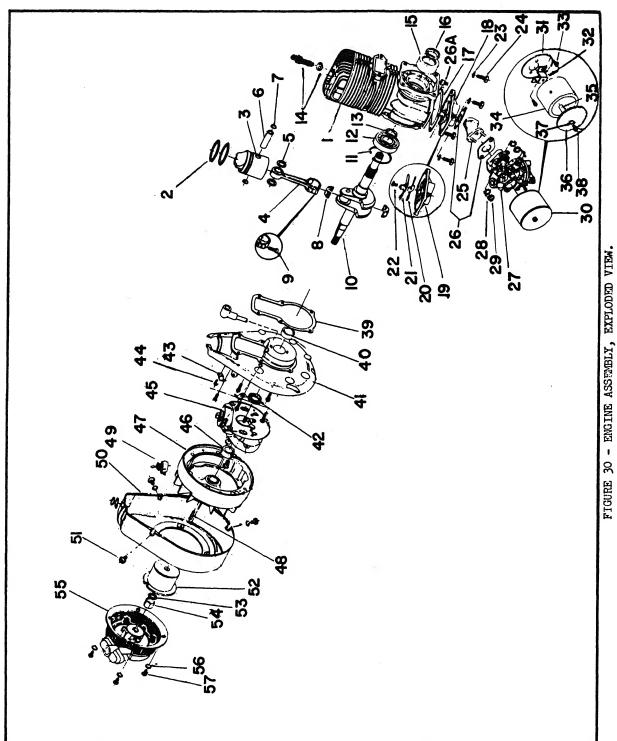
ENGINE ASSEMBLY, EXPLODED VIEW--CONTINUED
